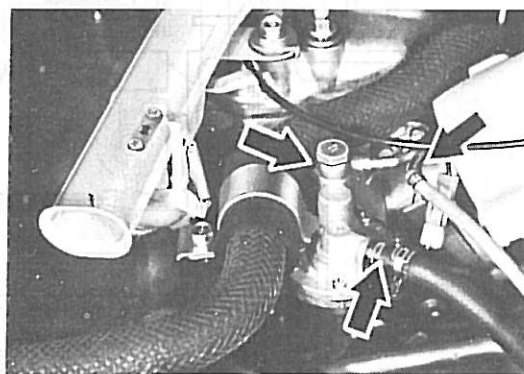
Checking Fuel Pump for Fuel Leakage
